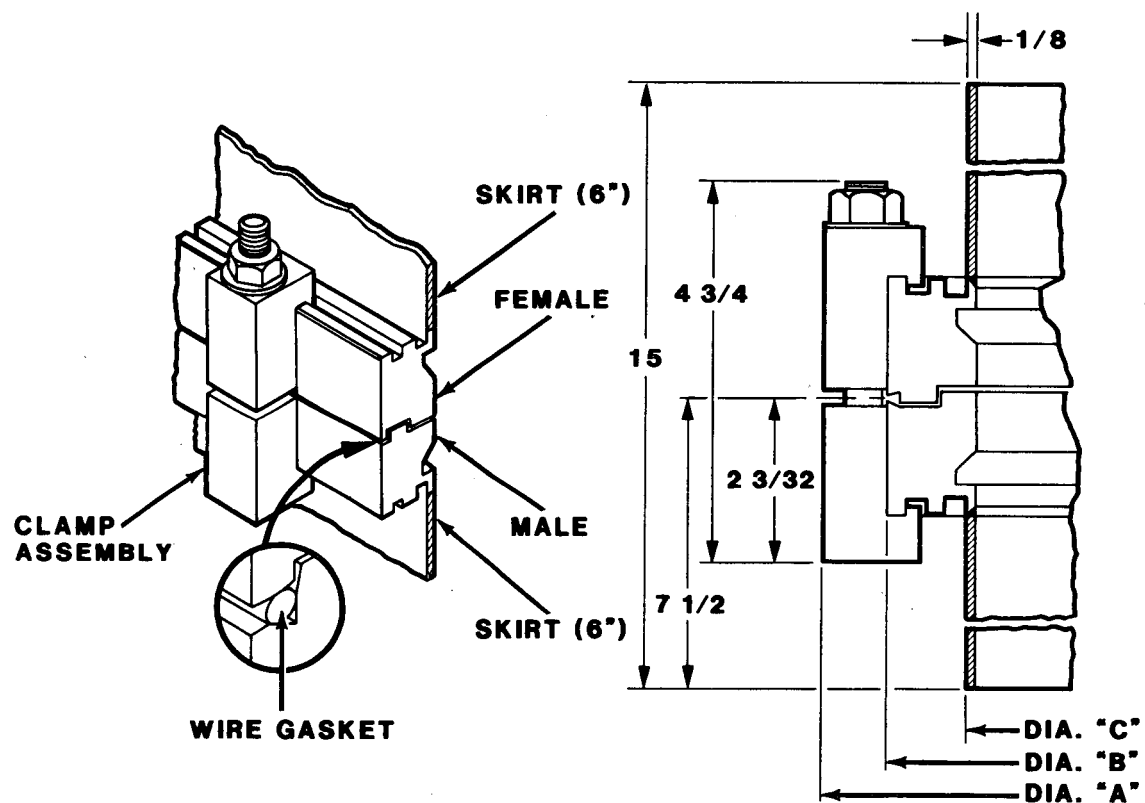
The Wheeler Wire Gasket Seal (Ref. 3.4-2), reprinted with permission of Macmillan Publishing Company from "Theory and Application of Metal Gasket Seals," Transactions of the Tenth National Vacuum Symposium of the American Vacuum Society, by W. R. Wheeler, edited by G. H. Bancroft. Copyright © 1964 by American Vacuum Society, Inc.)
